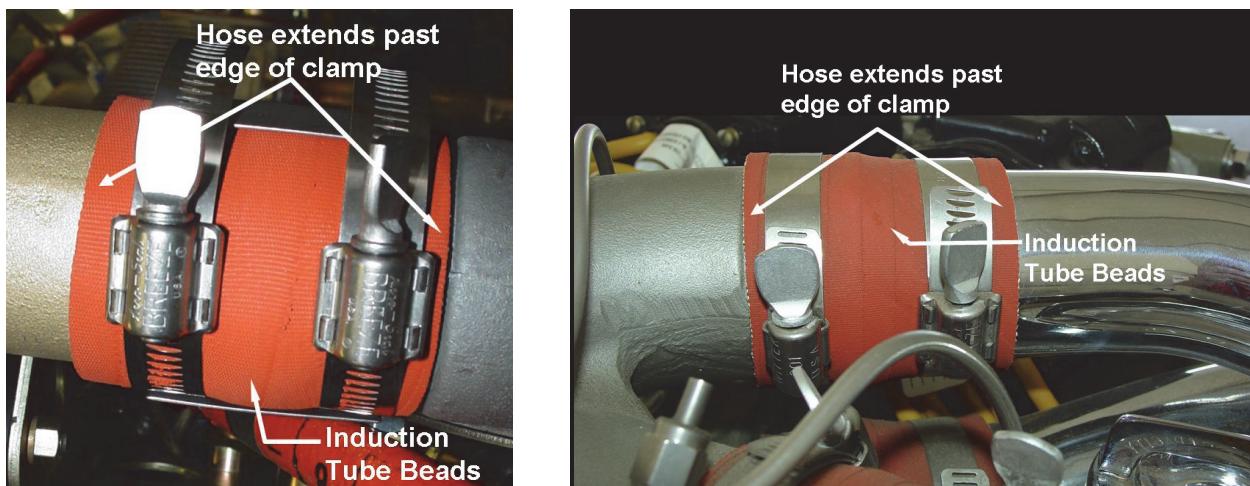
Properly Installed Induction Tube, Hose and Clamps
